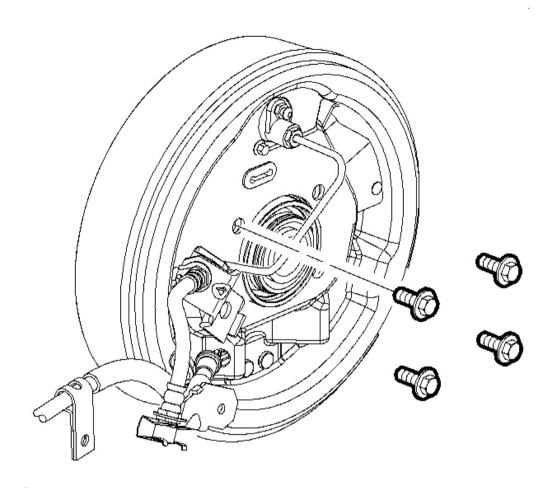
Wheel Bearing/Hub & Mounting Bolts Courtesy of GENERAL MOTORS CORP.
